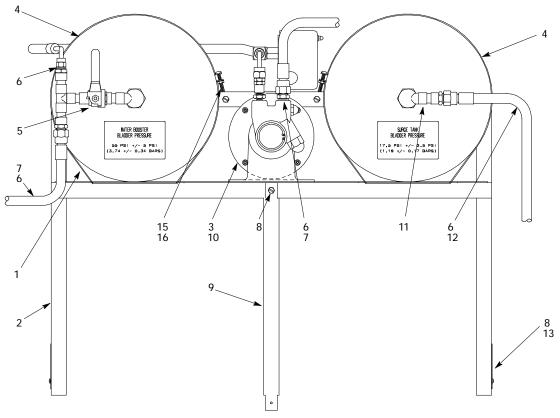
WATER BOOSTER AND SURGE TANK ASSEMBLY
